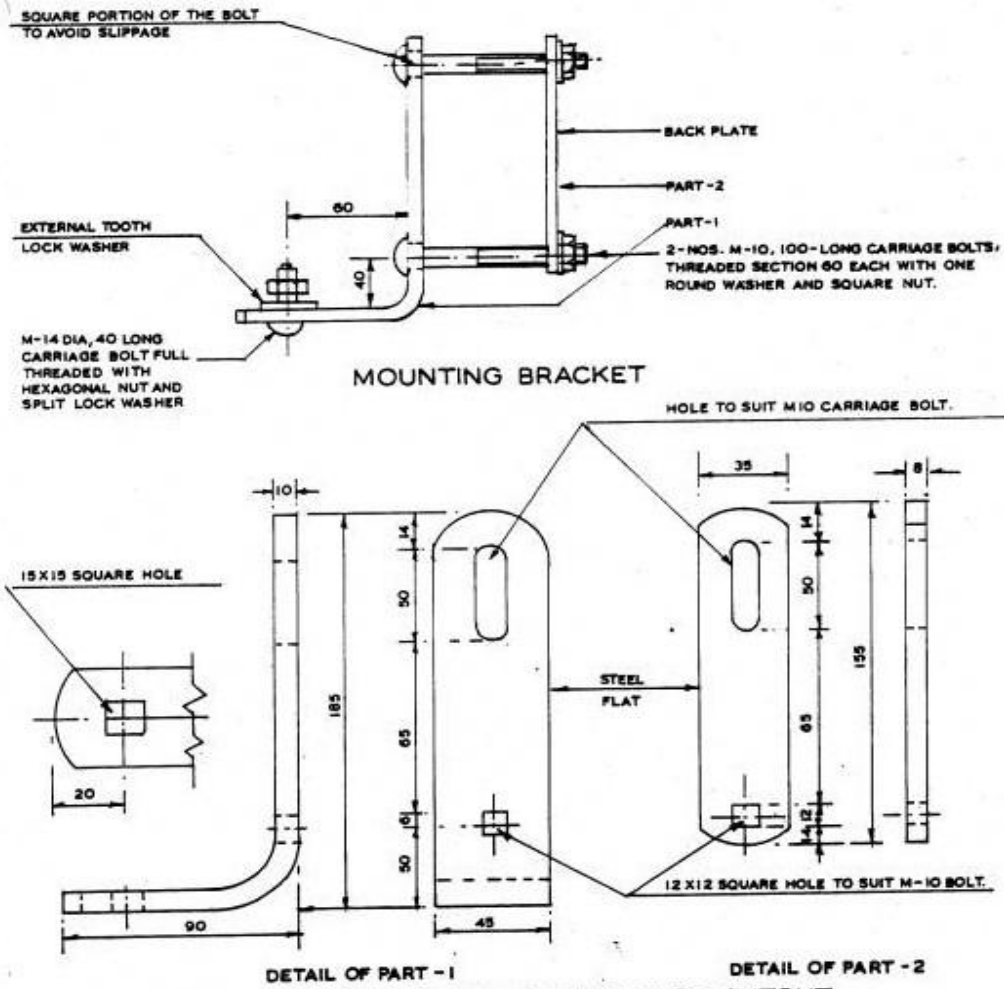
MOUNTING DETAILS OF 11KV FUSE CUTOUT
